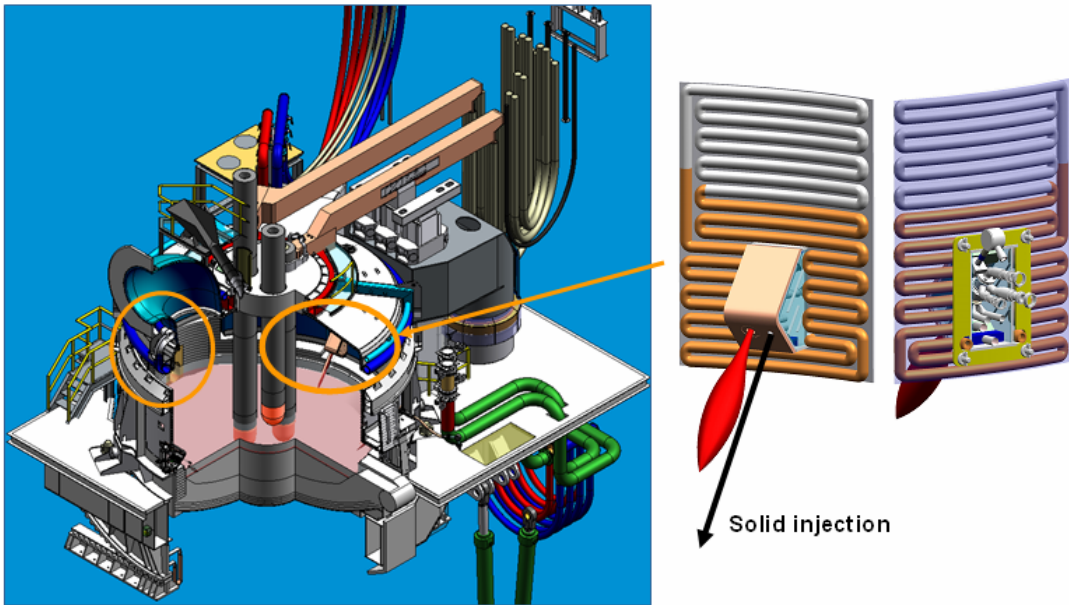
RCB Installation at POSCO ZPSS 130 t EAF
